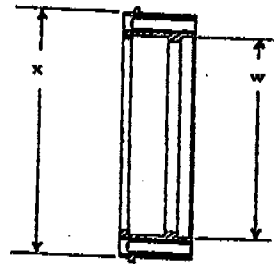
Second Stage Gas Producer Rotor Assembly, Nozzle Assembly, and Cylinder Dimensional Inspection Locations (Sheet 1 of 3).
